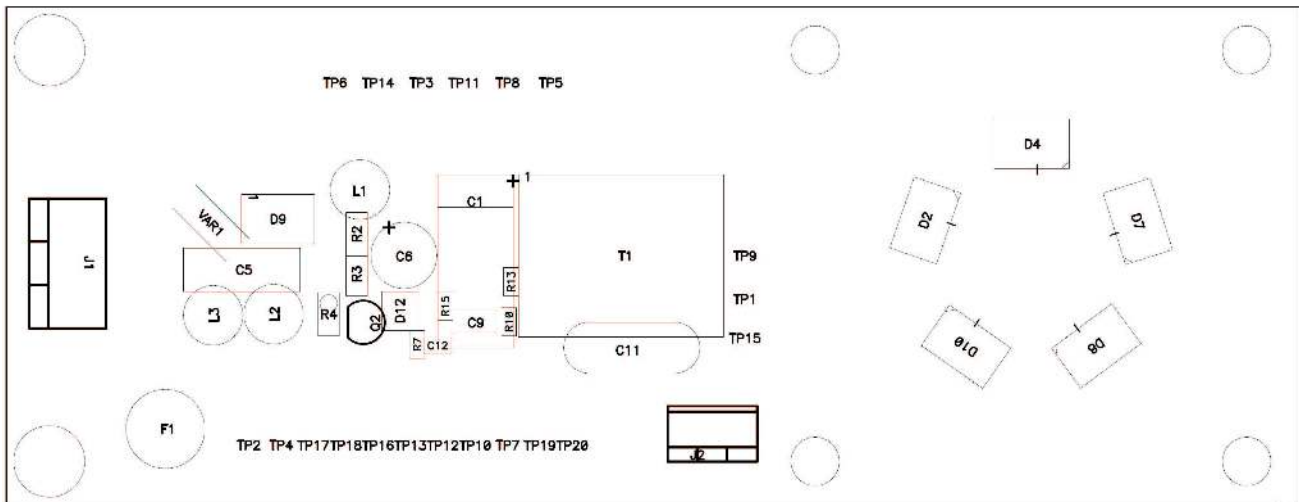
TPS92070EVM-648 Top Layer Assembly Drawing (Top View)
